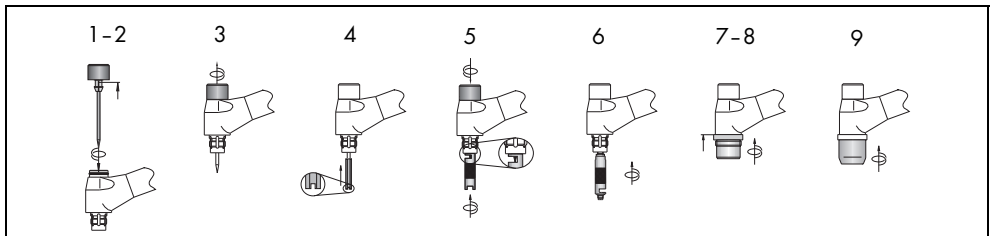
Steps for setting up the ABIPLAS® WELD torch body
